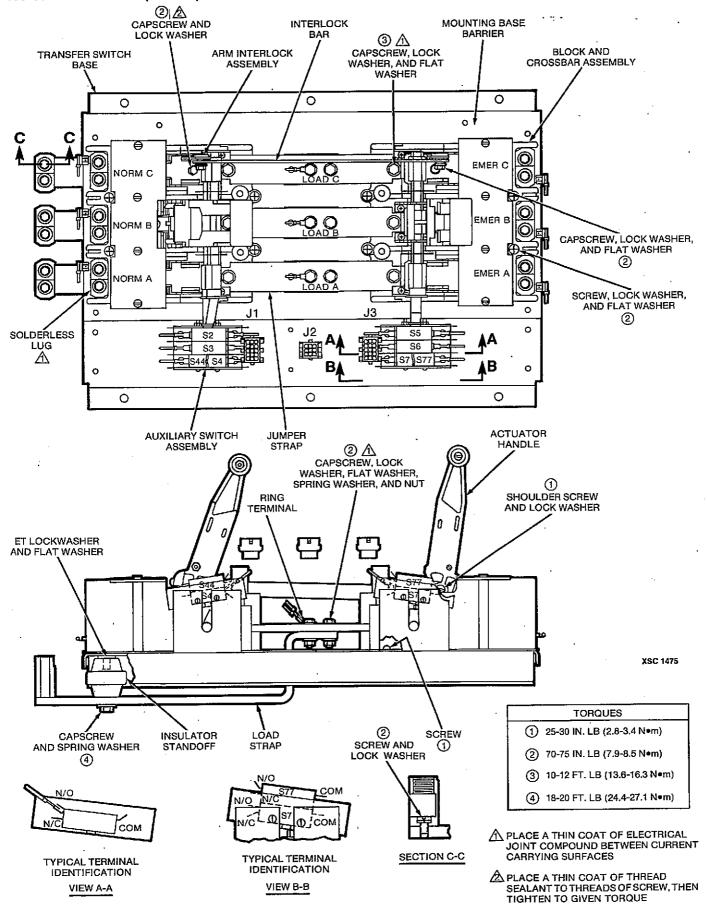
FRONT CONNECT TRANSFER SWITCH ASSEMBLY
